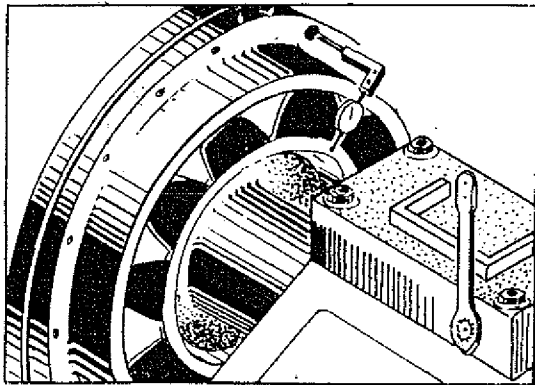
Correcting the Concentricity between Gearbox and Flywheel
